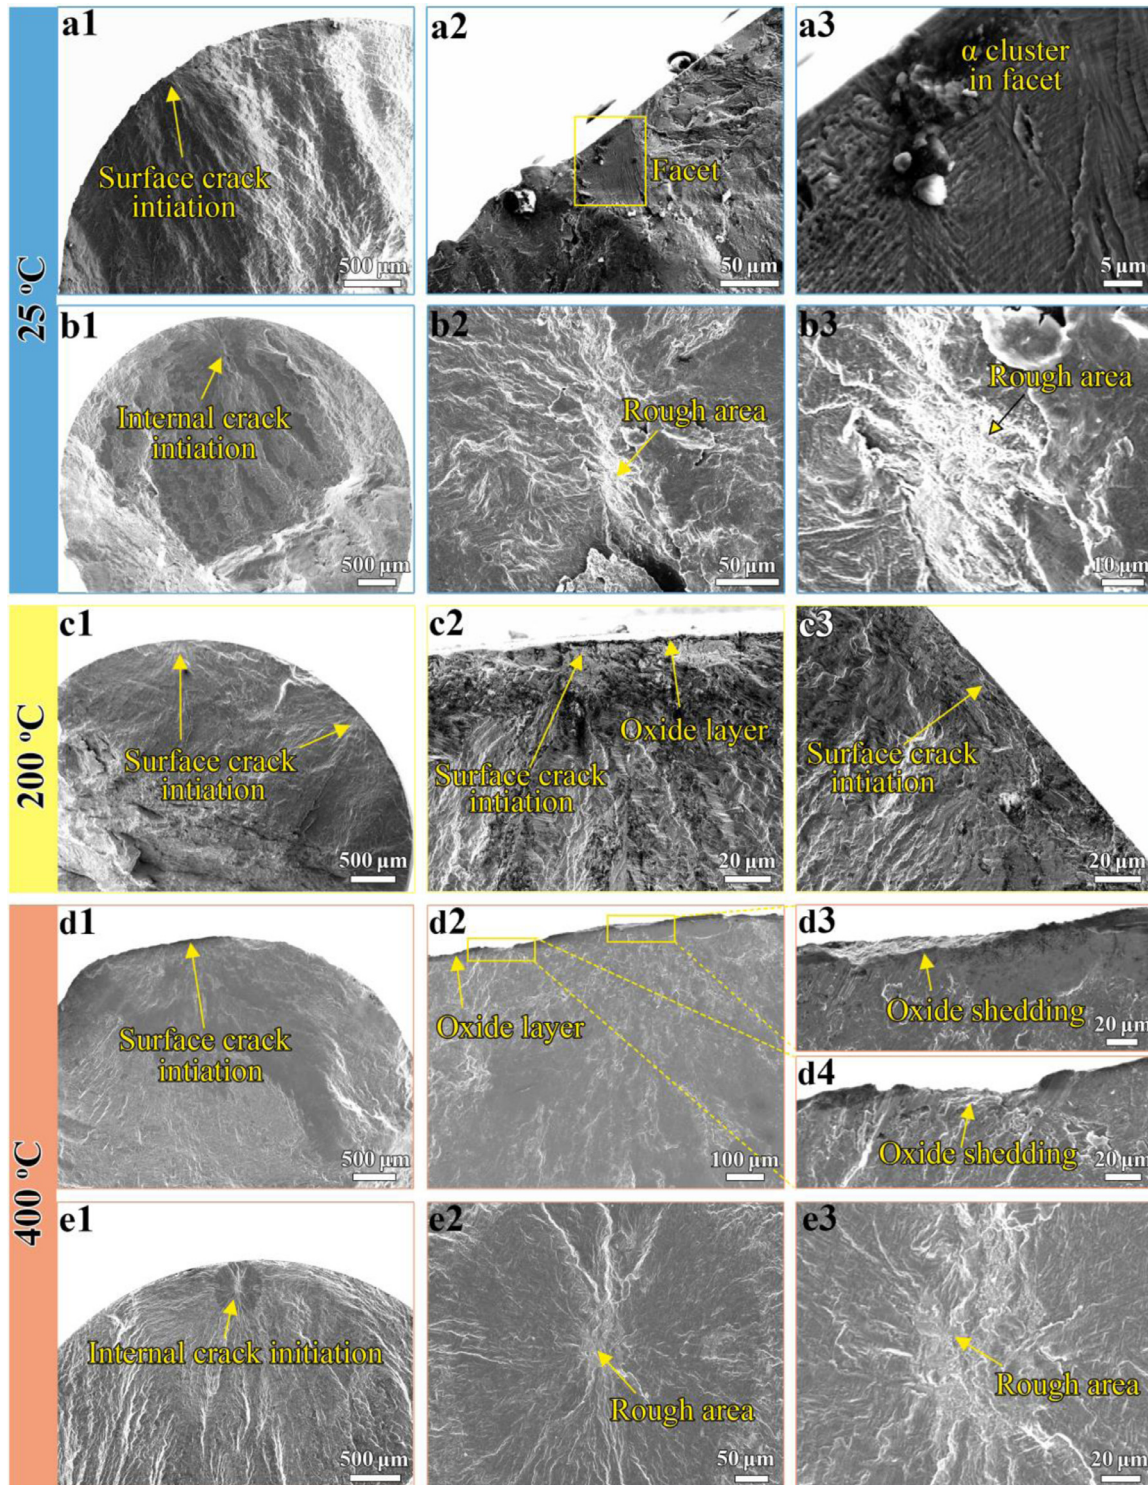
Fracture surfaces of smooth specimens at different temperatures. (a1) Surface crack initiation at 25 °C ($\sigma_a=650$ MPa, $N_f=3.9 \times 10^4$ cycles). (a2) Surface crack initiation with facet. (a3) An enlarged view of the facet in (a2). (b1) Internal crack initiation at 25 °C ($\sigma_a=620$ MPa, $N_f=6.0 \times 10^6$ cycles). (b2) Internal crack initiation with rough area. (b3) An enlarged view of the rough area in (b2). (c1) Multiple surface crack initiations by oxide intrusion at 200 °C ($\sigma_a=650$ MPa, $N_f=2.7 \times 10^4$ cycles). (c2, c3) Close-ups of the upper and the right crack initiation regions in (c1), respectively. (d1) Surface crack initiation by oxide shedding at 400 °C ($\sigma_a=520$ MPa, $N_f=7.6 \times 10^5$ cycles). (d2) An enlarged view of crack initiation region in (d1). (d3, d4) Close-ups of the oxide shedding regions in (d2). (e1) Internal crack initiation at 400 °C ($\sigma_a=520$ MPa, $N_f=1.0 \times 10^6$ cycles). (e2) Internal crack initiation with rough area. (e3) An enlarged view of the rough area in (e2).
